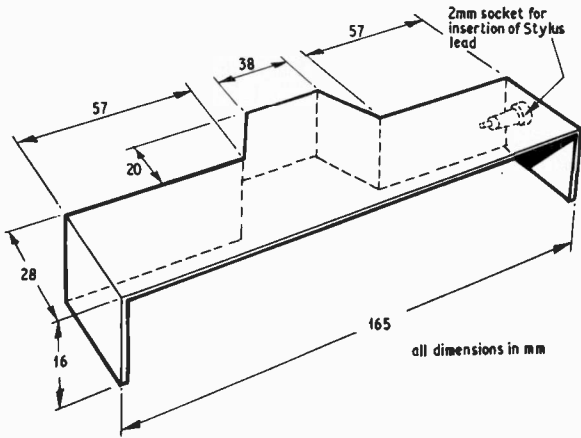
Dimensions of the keyboard cover which was made from 3mm card
